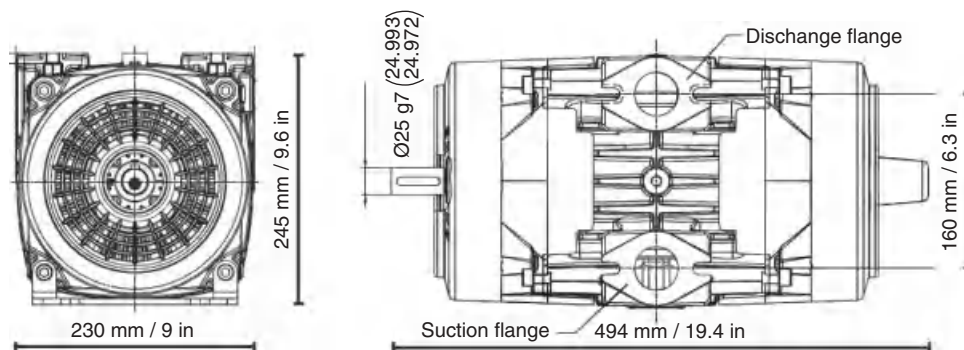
Sliding vane compressor. (Courtesy of GHH Schraubenkompressoren GmbH, Germany.)
